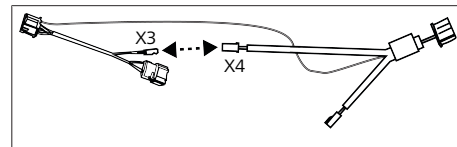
Connect the TCon2 cable to the adapter wiring harness
